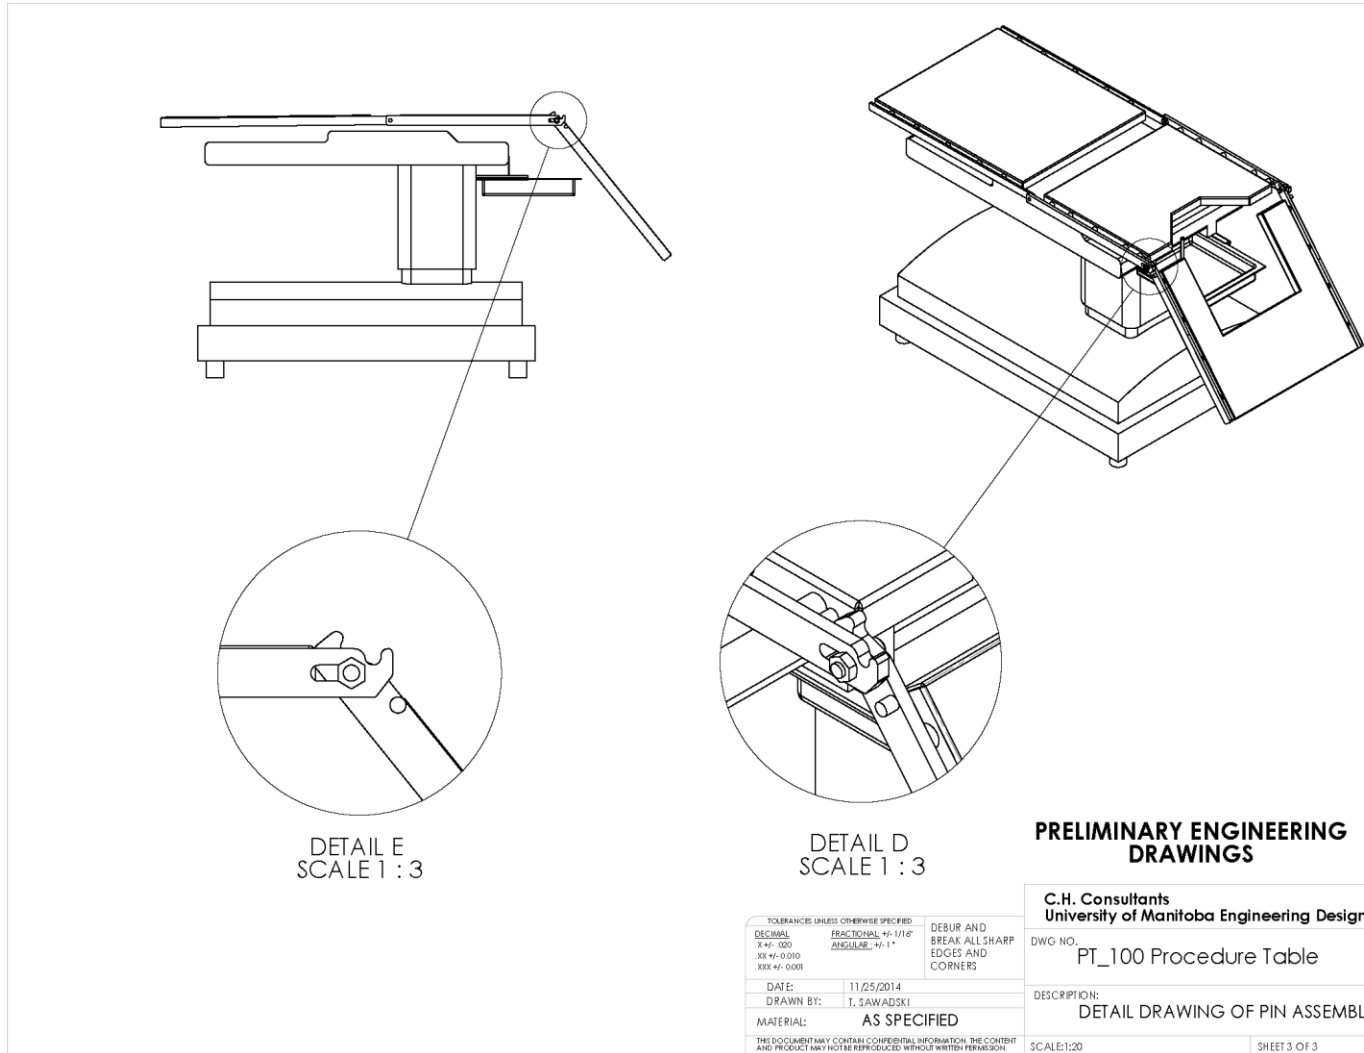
Preliminary engineering drawing for pin assembly of footrest
